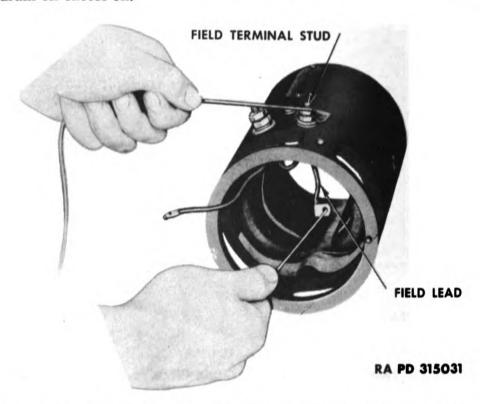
Testing Field Coils for Open Circuits with Test Probes—
